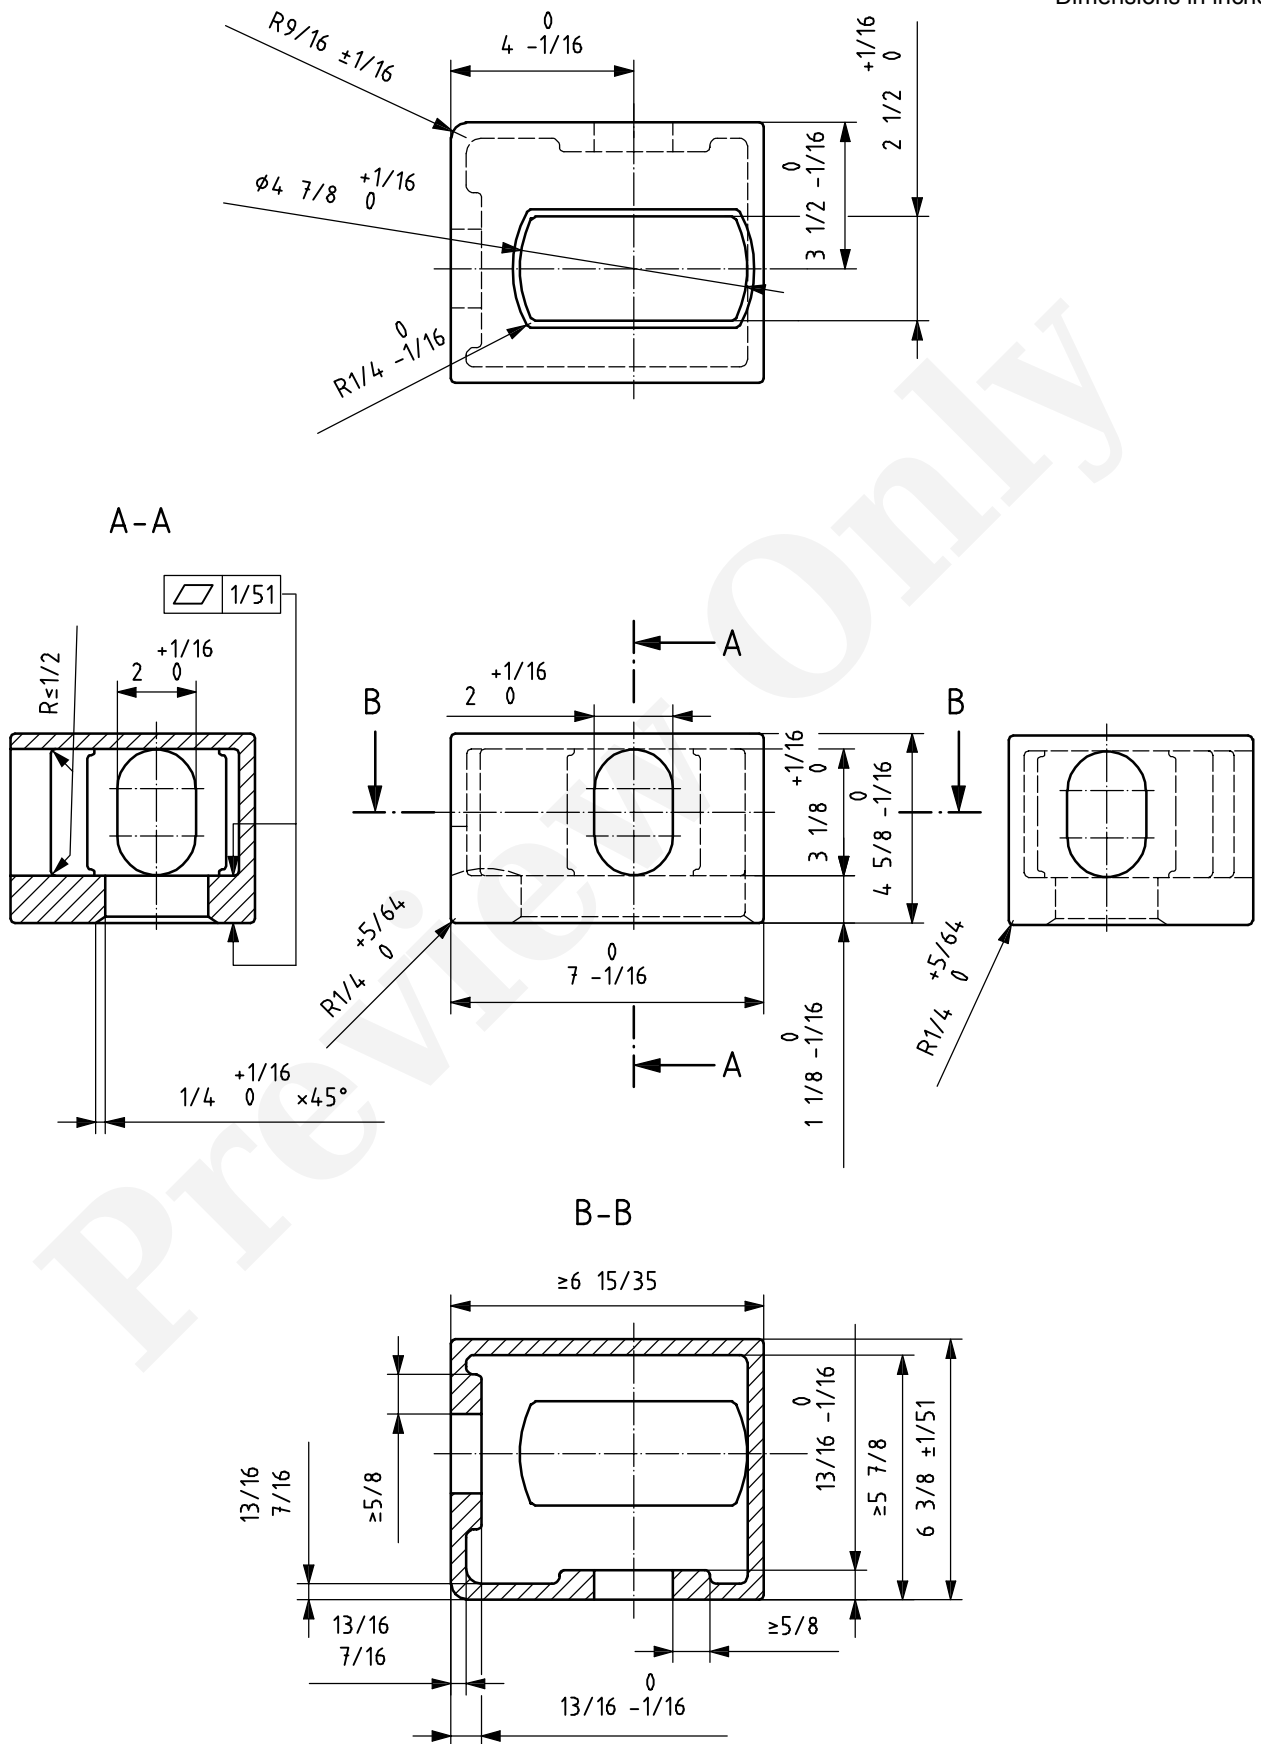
Bottom intermediate fitting — Dimensions in inches
